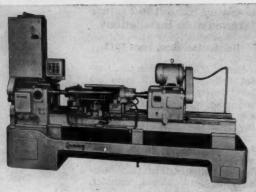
Automatic drilling and centering machine has a "walking beam" type loader for handling shafts.
